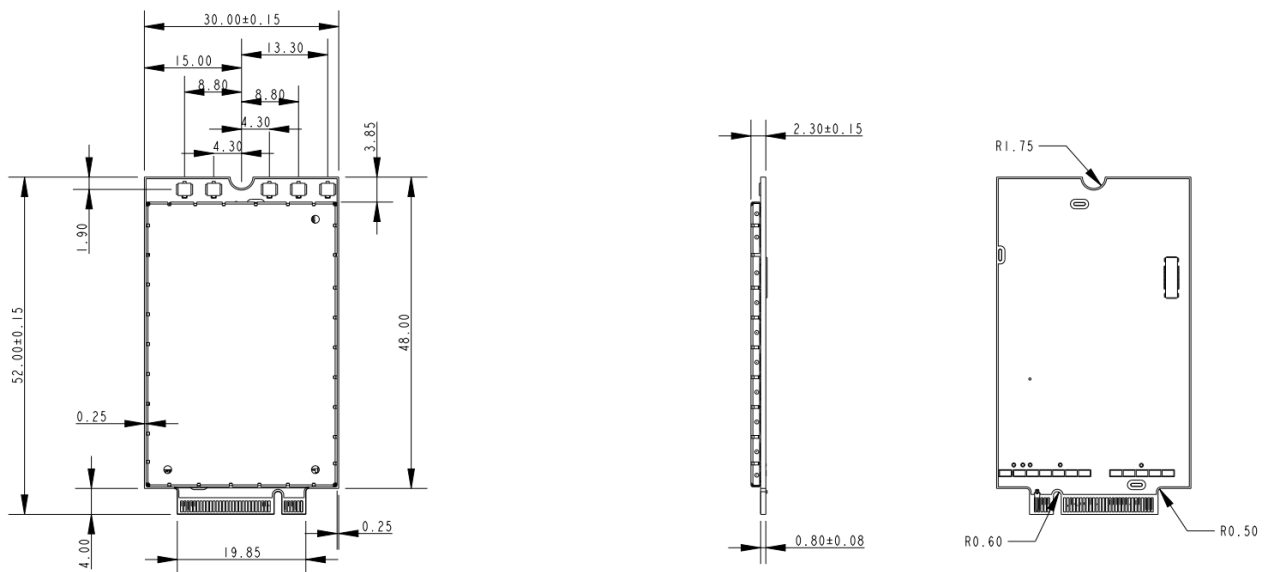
FN990B FAMILY Module Mechanical Dimensions
